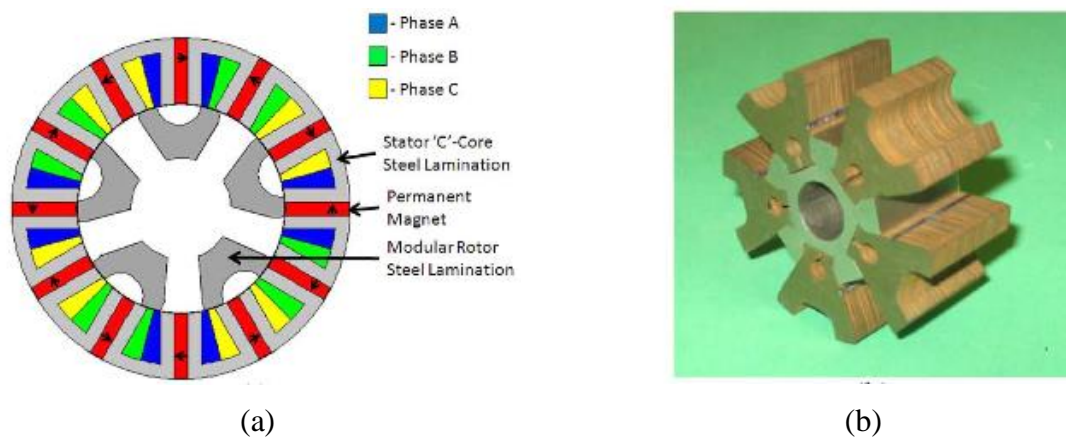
Modular rotor FSPM machine (a) Section view (b) Prototype rotor [81]
